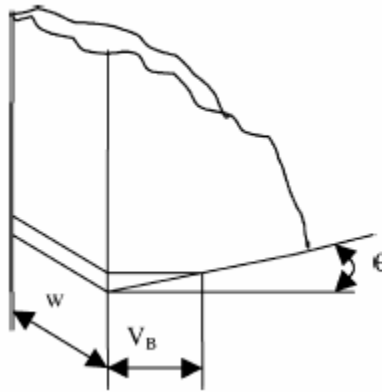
Schematic of cutting tool with zero degree rake angle, where w is the tool width, V_B the flank wear and θ is the relief angle
